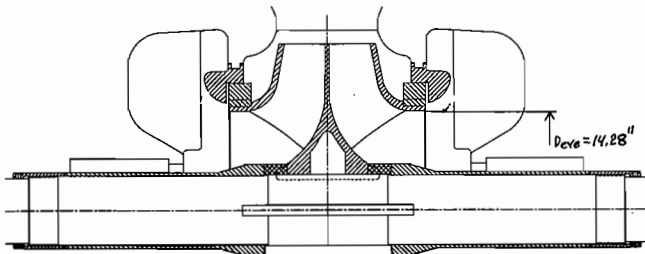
New Impeller Design (Smaller Eye and Special "P-Vlade" Inlets)
